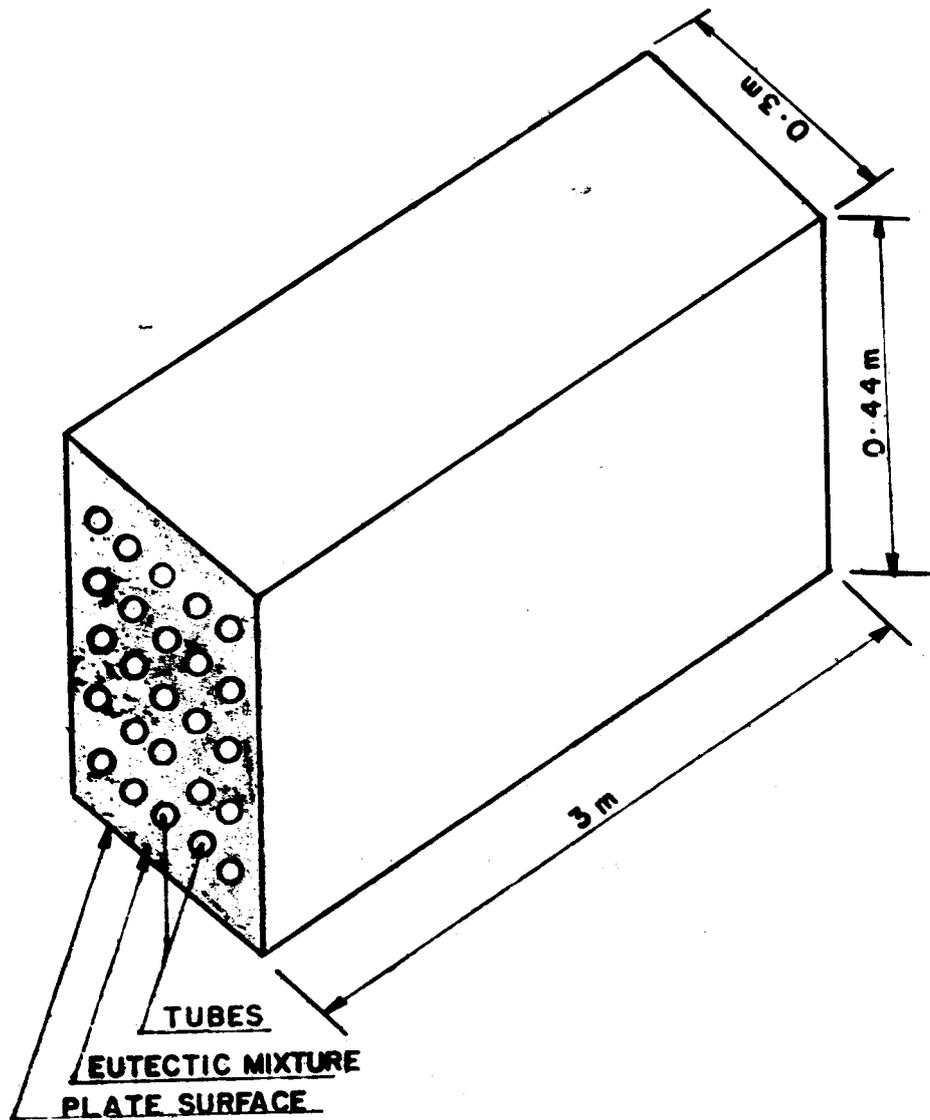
PLATE BANK SHOWING TUBES AND EUTECTIC MIXTURE ARRANGEMENT.
